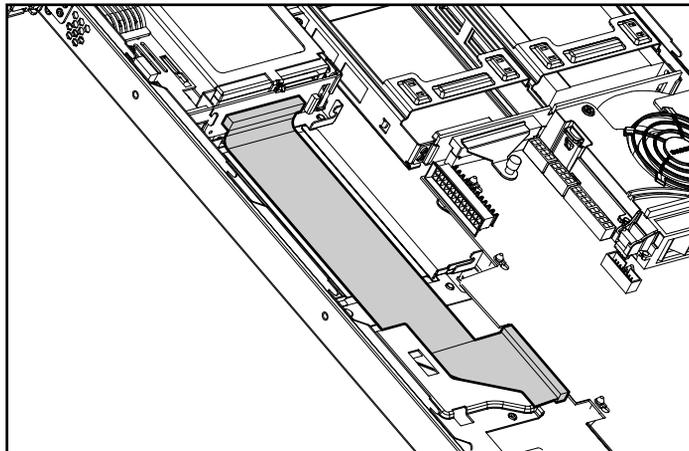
Cable routing from the CD-ROM/diskette drive backplane to system board (power supply, cable protector, and PCI riser board assembly removed for clarity)
